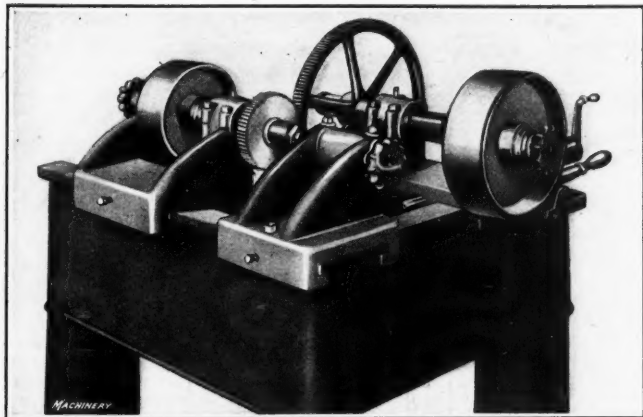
Fixture for testing Spur Gears for Noise under Load
